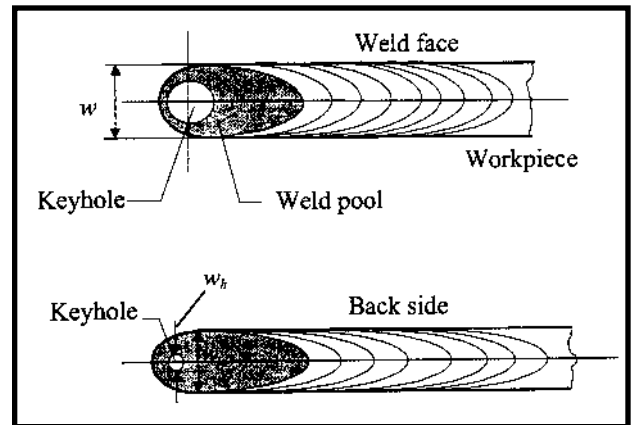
Geometrical parameters of weld pool and keyhole.
